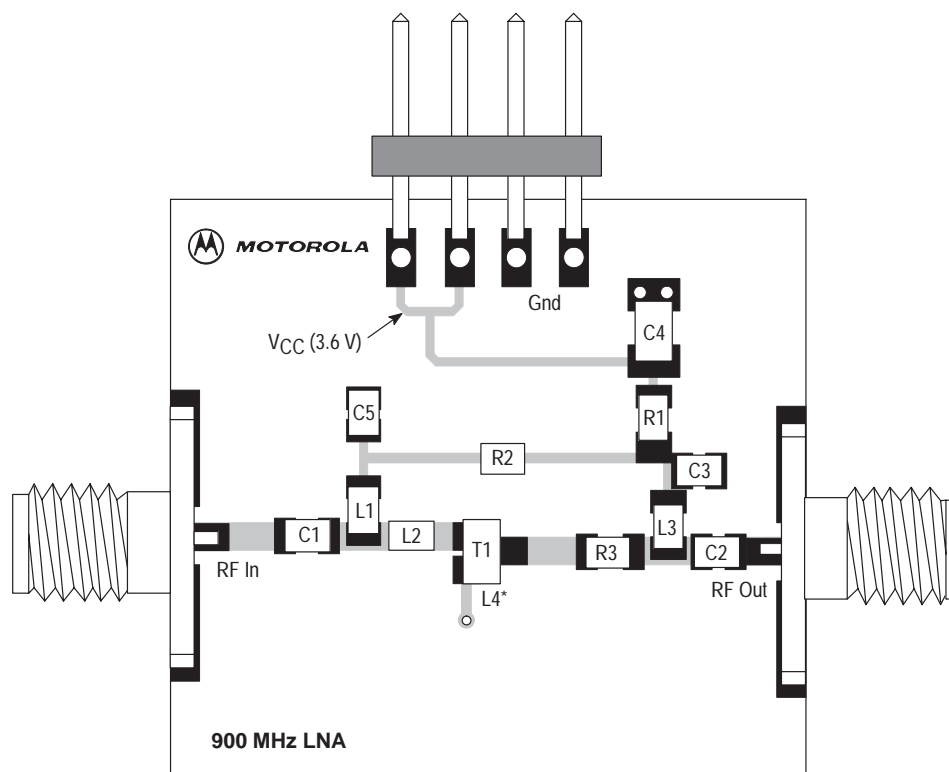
shows the printed circuit board layout and parts placement for the first stage, and Table 1 shows the list of components used on the LNA demo board first stage.
